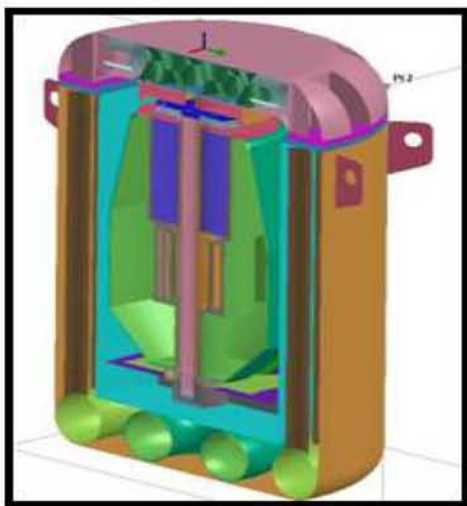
Sectional View of LDI-1000 (Cs) Package (Elevation)
